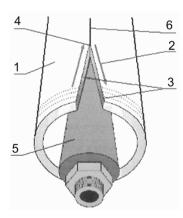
Magnetic resistor [8]; 1 -welded pipe, 2 -inducted current, 3 -welded metal sheet edges, 4 -welded point, 5 -magnetic resistor, 6 -weld
